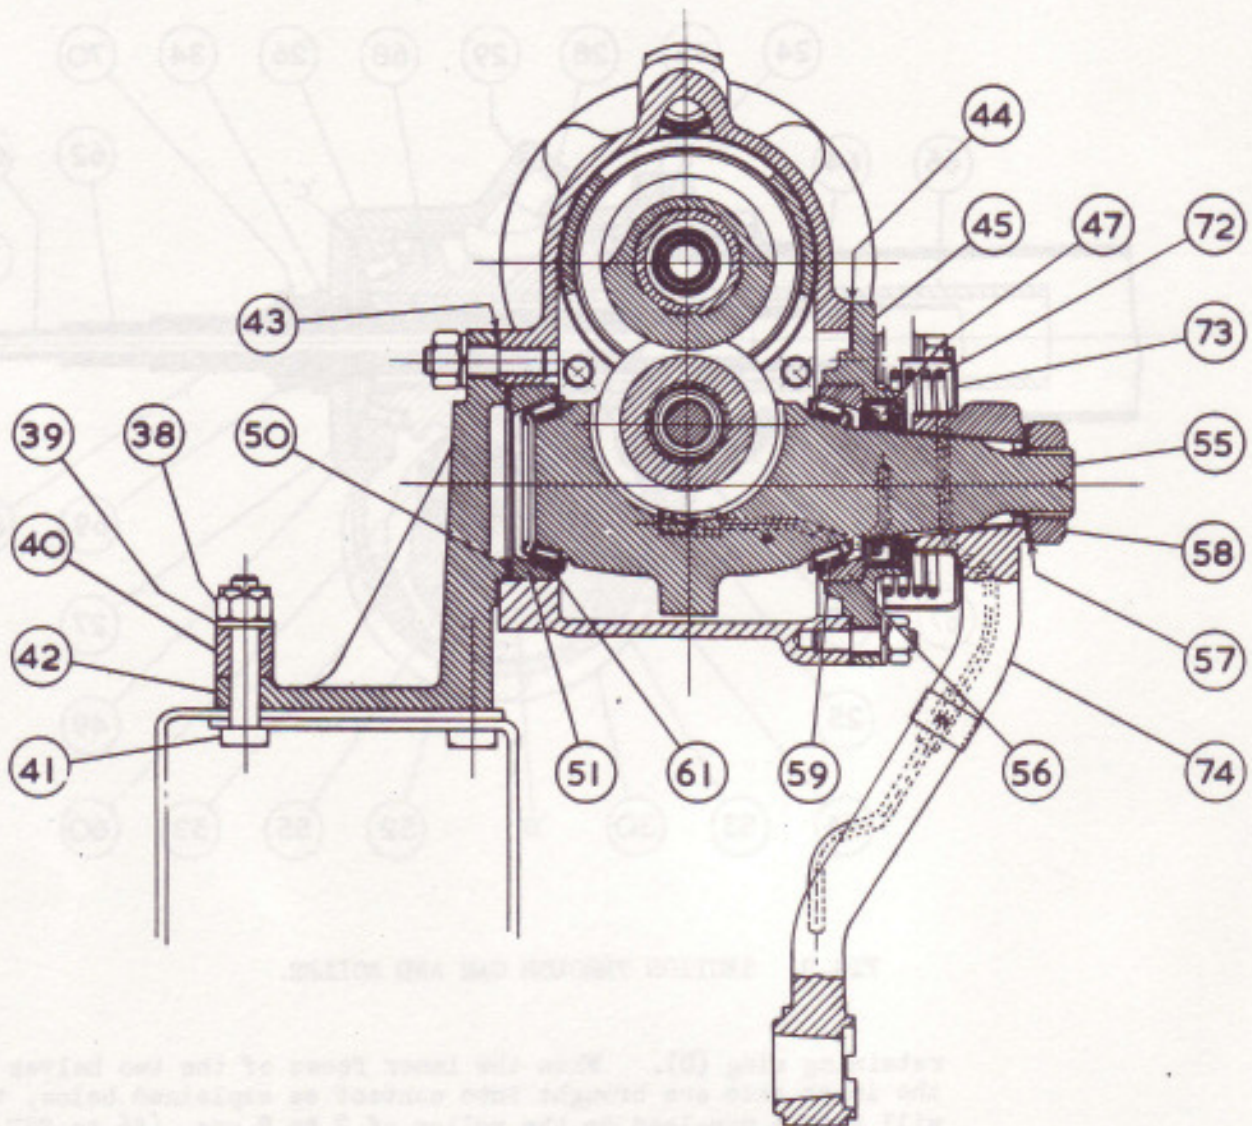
SECTION THROUGH ROCKING SHAFT.
